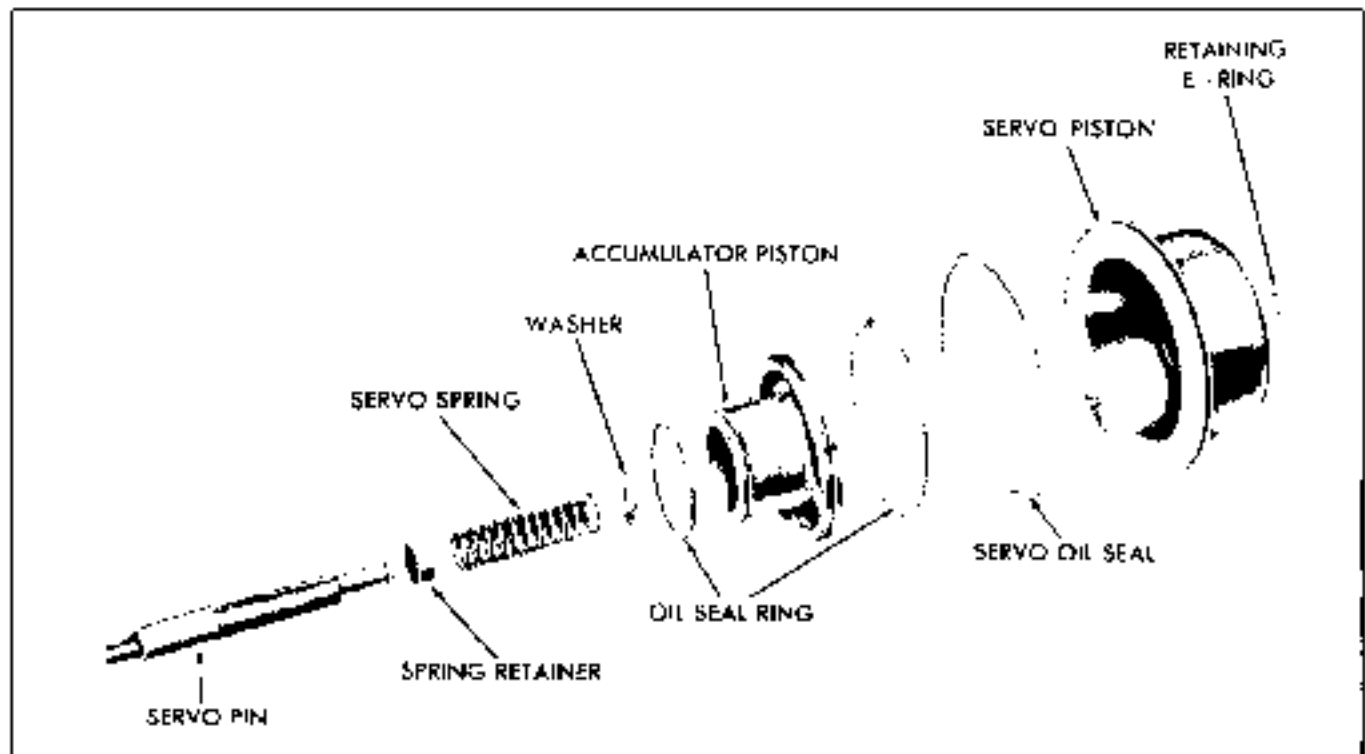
E-63 Exploded View of Rear Servo and Accumulator
